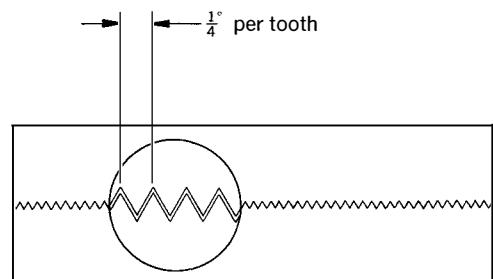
The serrated-tooth divider employs two face gears of identical shape and spacing of teeth. One member is displaced axially to disengage the teeth, then rotated radially to the desired nominal angle. The "rotating" member
